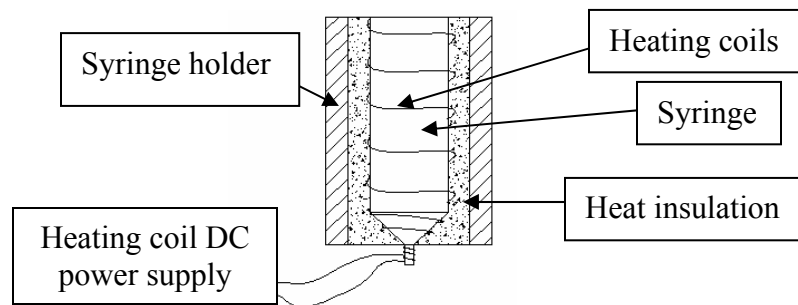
Schematic drawing showing the syringe and nozzle heating system.
